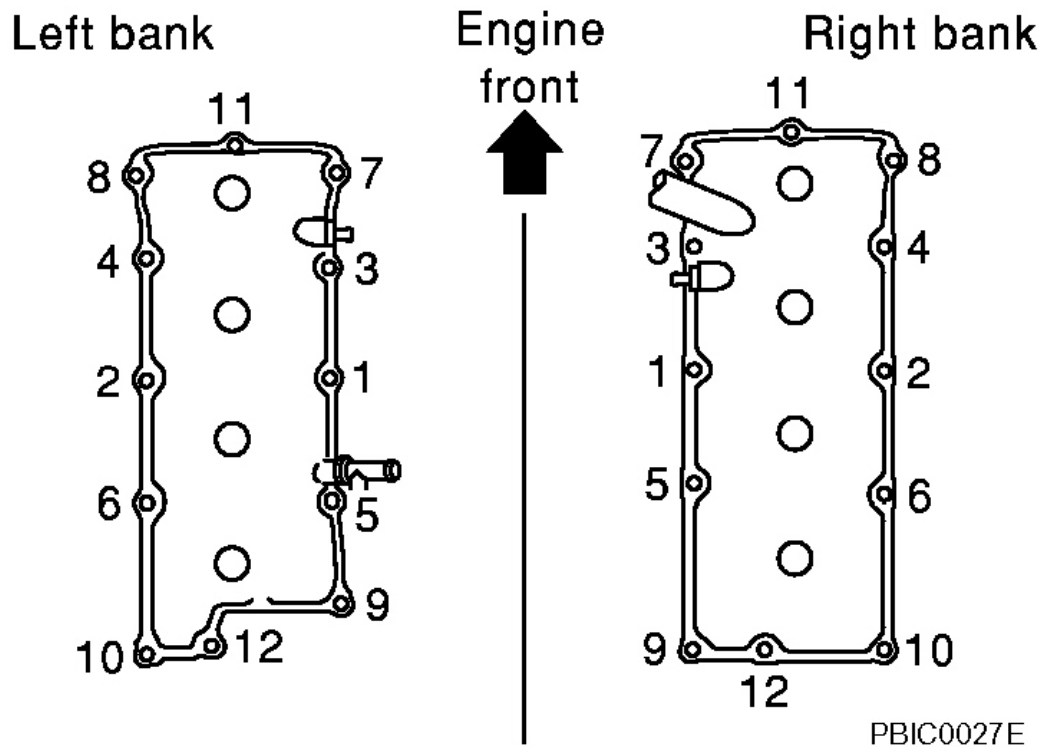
Identifying Rocker Cover Gaskets To Rocker Covers
